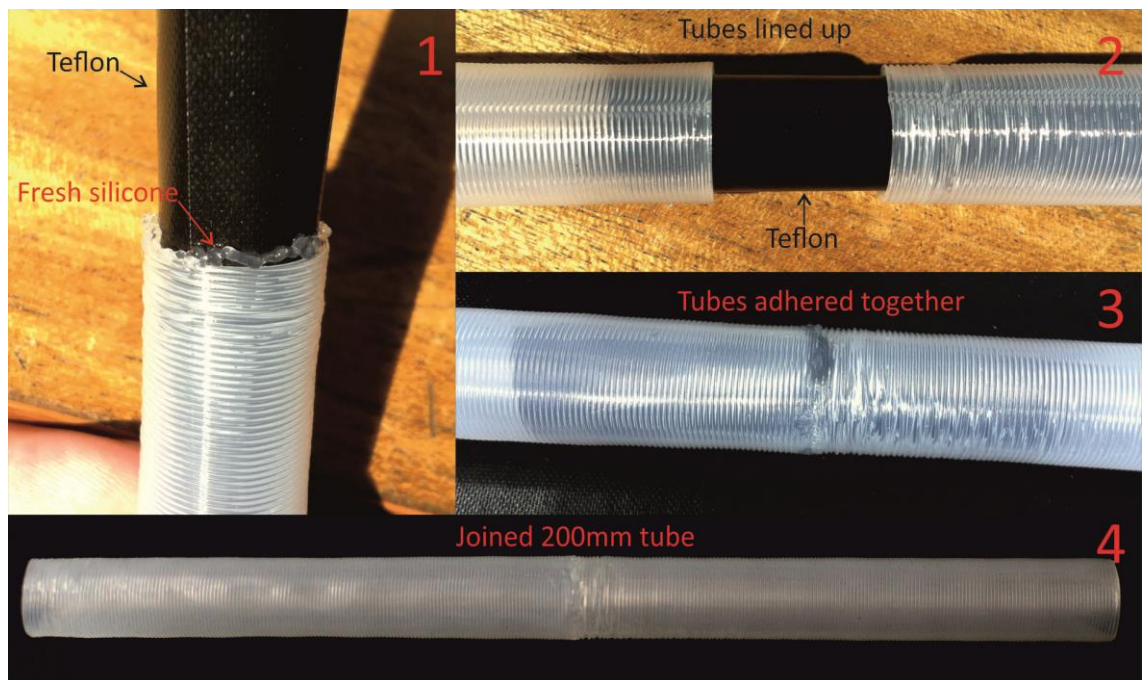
, Method for joining two hollow tubes with silicone, Teflon sheet was used as a guide. figure by author
